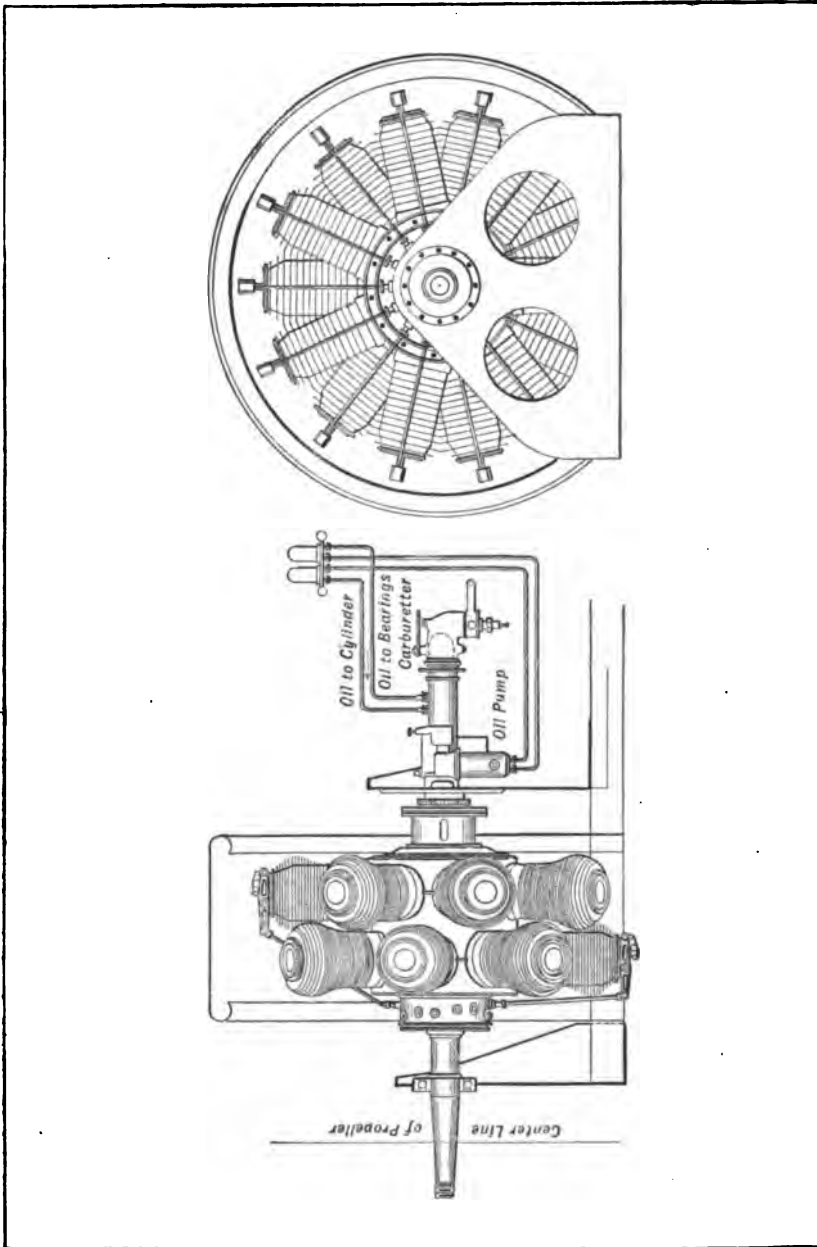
C. Assembly view of the fourteen-cylinder Gnome motor.
